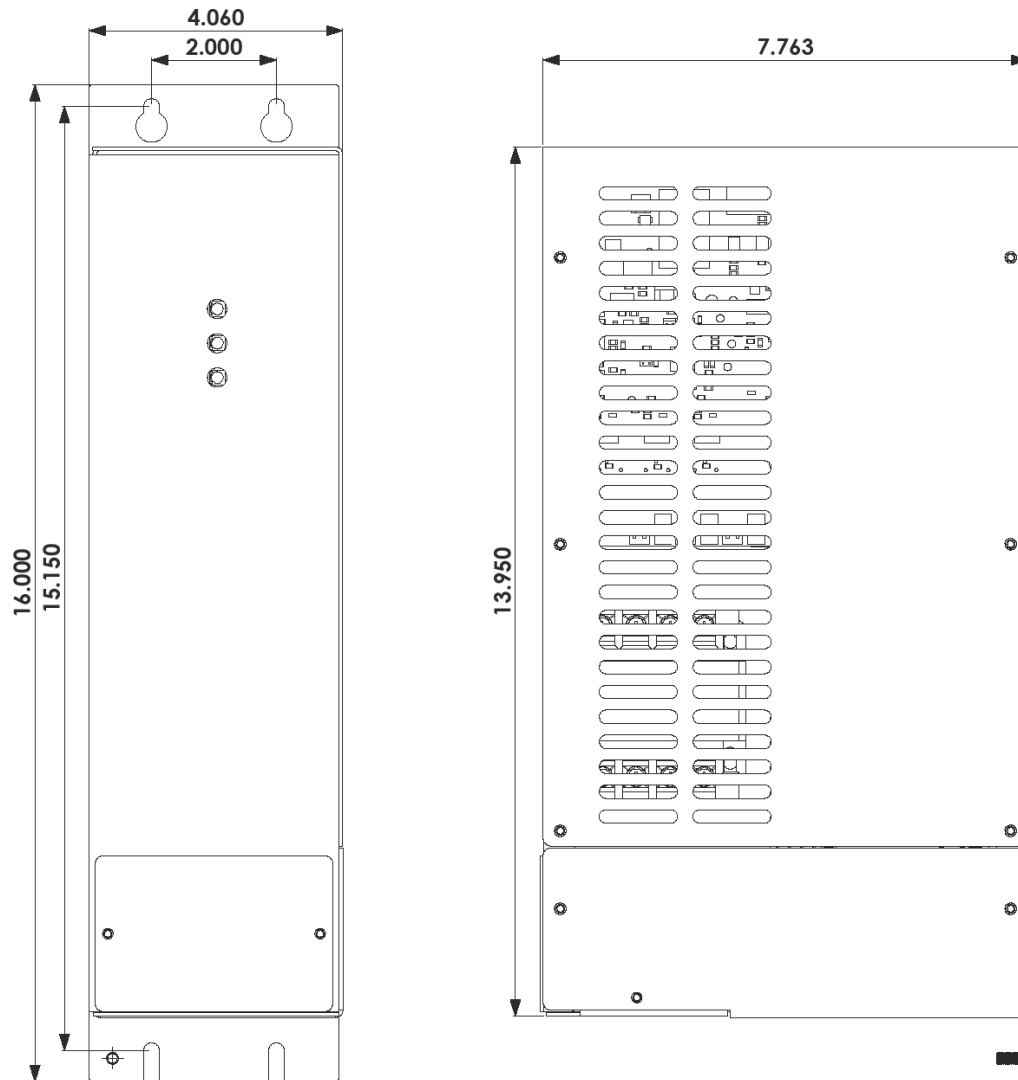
2: M3545P – 6 Amps A4 (Obsolete) Chassis Dimensional Outline
